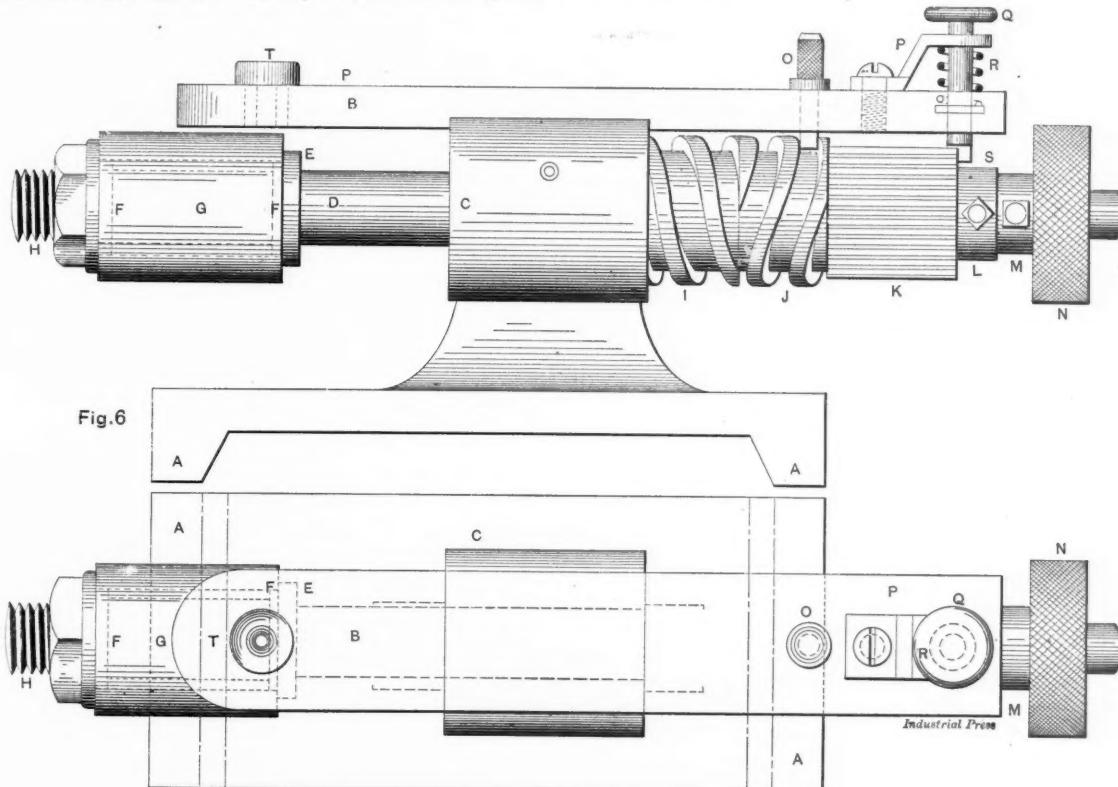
Jig for Drilling Holes in a Spiral Line around a Cylinder.
